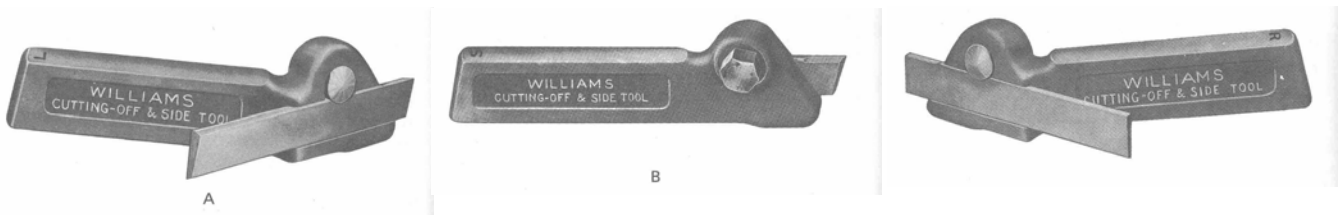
types of solid cutting off tool holders: (a) left-hand , (b) straight , (c) right-hand
